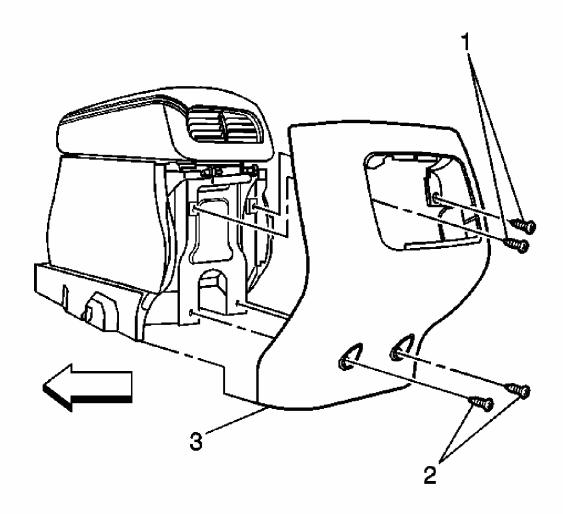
View Of Floor Console Rear Cover & Screws Courtesy of GENERAL MOTORS CORP.
